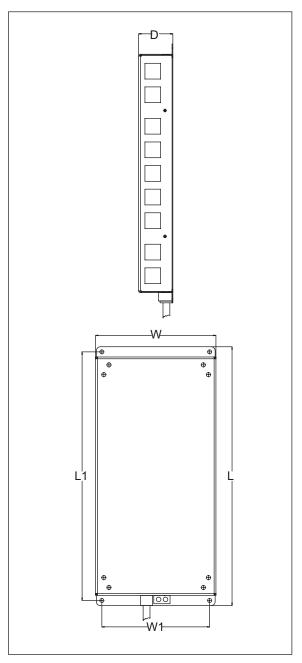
Dimension drawing: Braking resistor, frame sizes FSA and FSB
